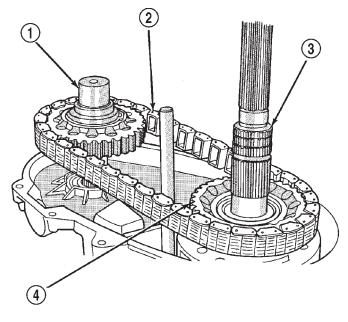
Installing Drive Chain, Front Output Shaft And Drive Sprocket
